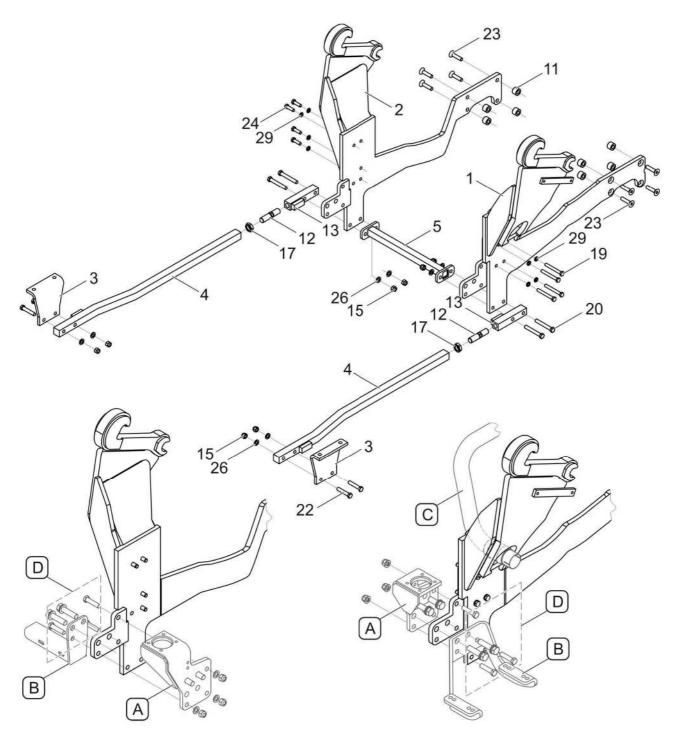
A Mounting bearing frame on 5112/5122 tractors
